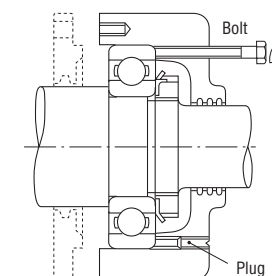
Removal of Outer Ring with Dismounting Bolts
